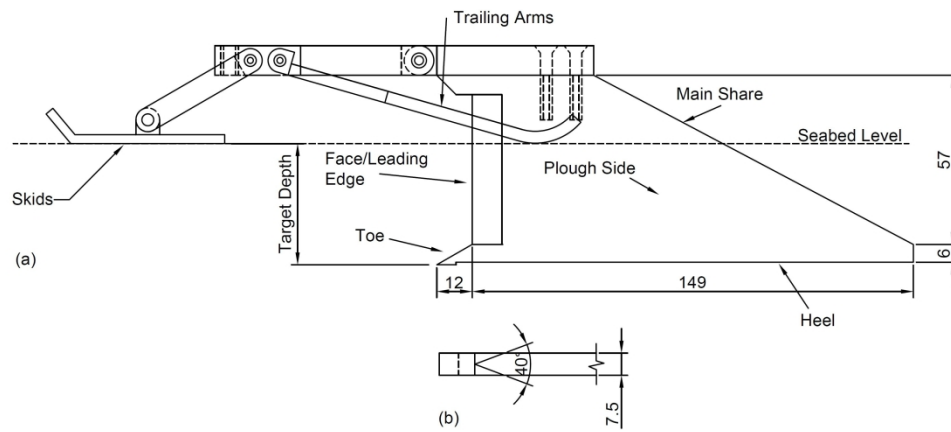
(a) Side elevation of 1/50th scale model cable plough in ploughing configuration showing key share dimensions, (b) incorporating plan view (in section) of tip geometry (dimensions in mm at model scale).
